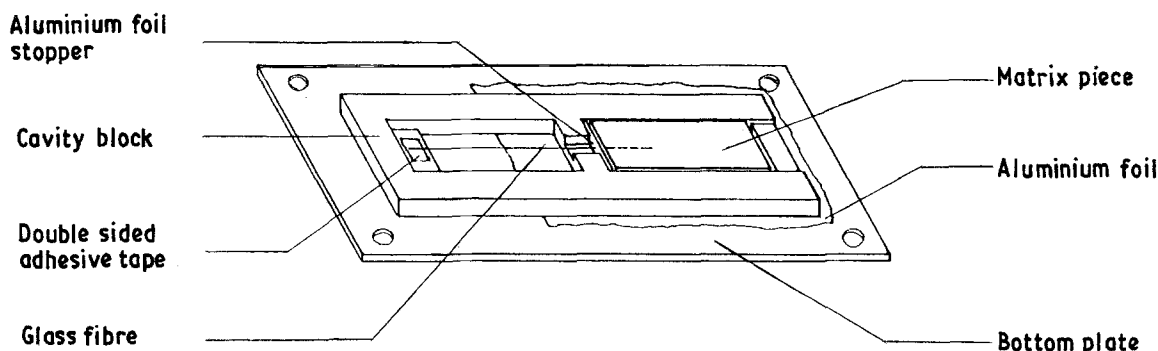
Specimen jig used for compression moulding the pull-out specimens.
